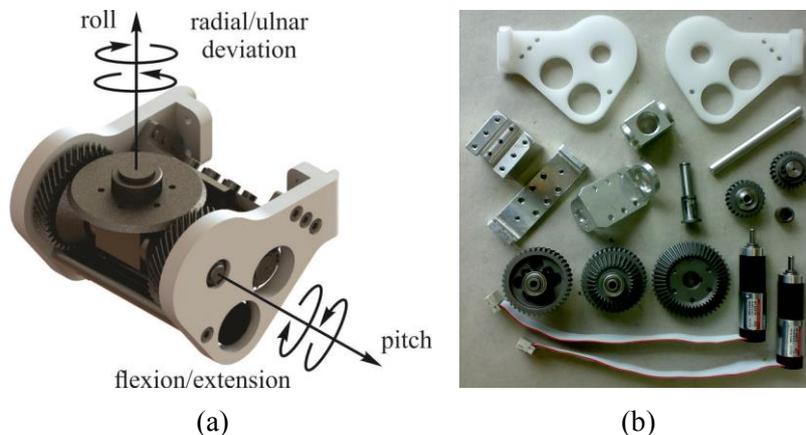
Wrist mechanism: (a) CAD model and (b) constitutive parts
